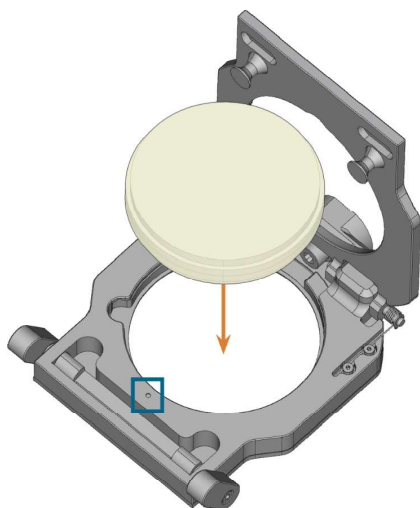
INSERTING A DISC INTO THE MATERIAL HOLDER
